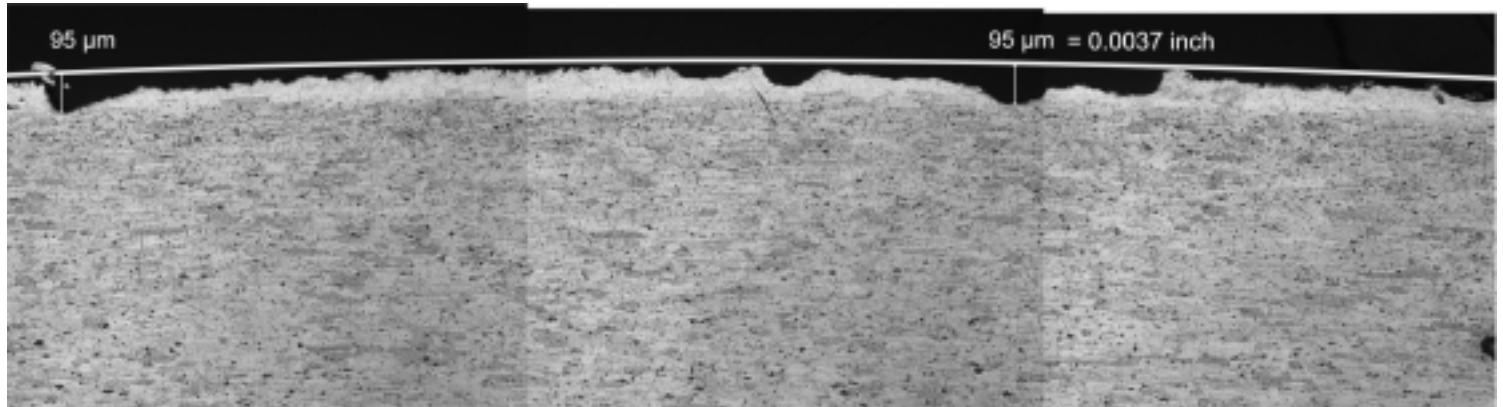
FILLET SEAL SCRATCH FEATURES - These skin surface features were observed at Plane A-A Figure. The clad layer of the skin appears to be penetrated at both measurement locations.
